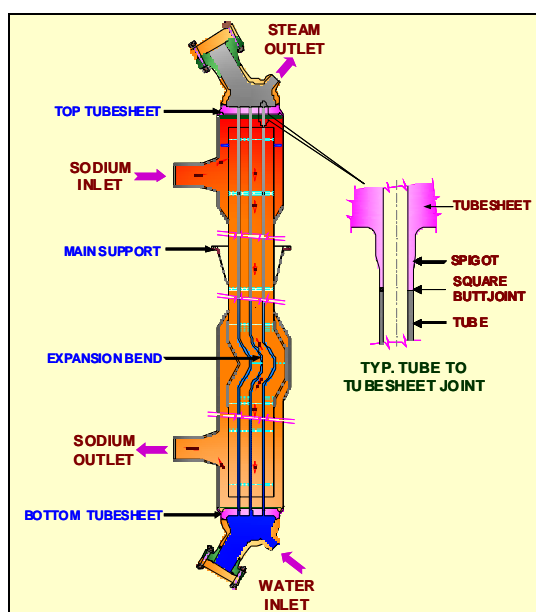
Schematic of steam generator of PFBR and its tube-to-tubesheet joint configuration
